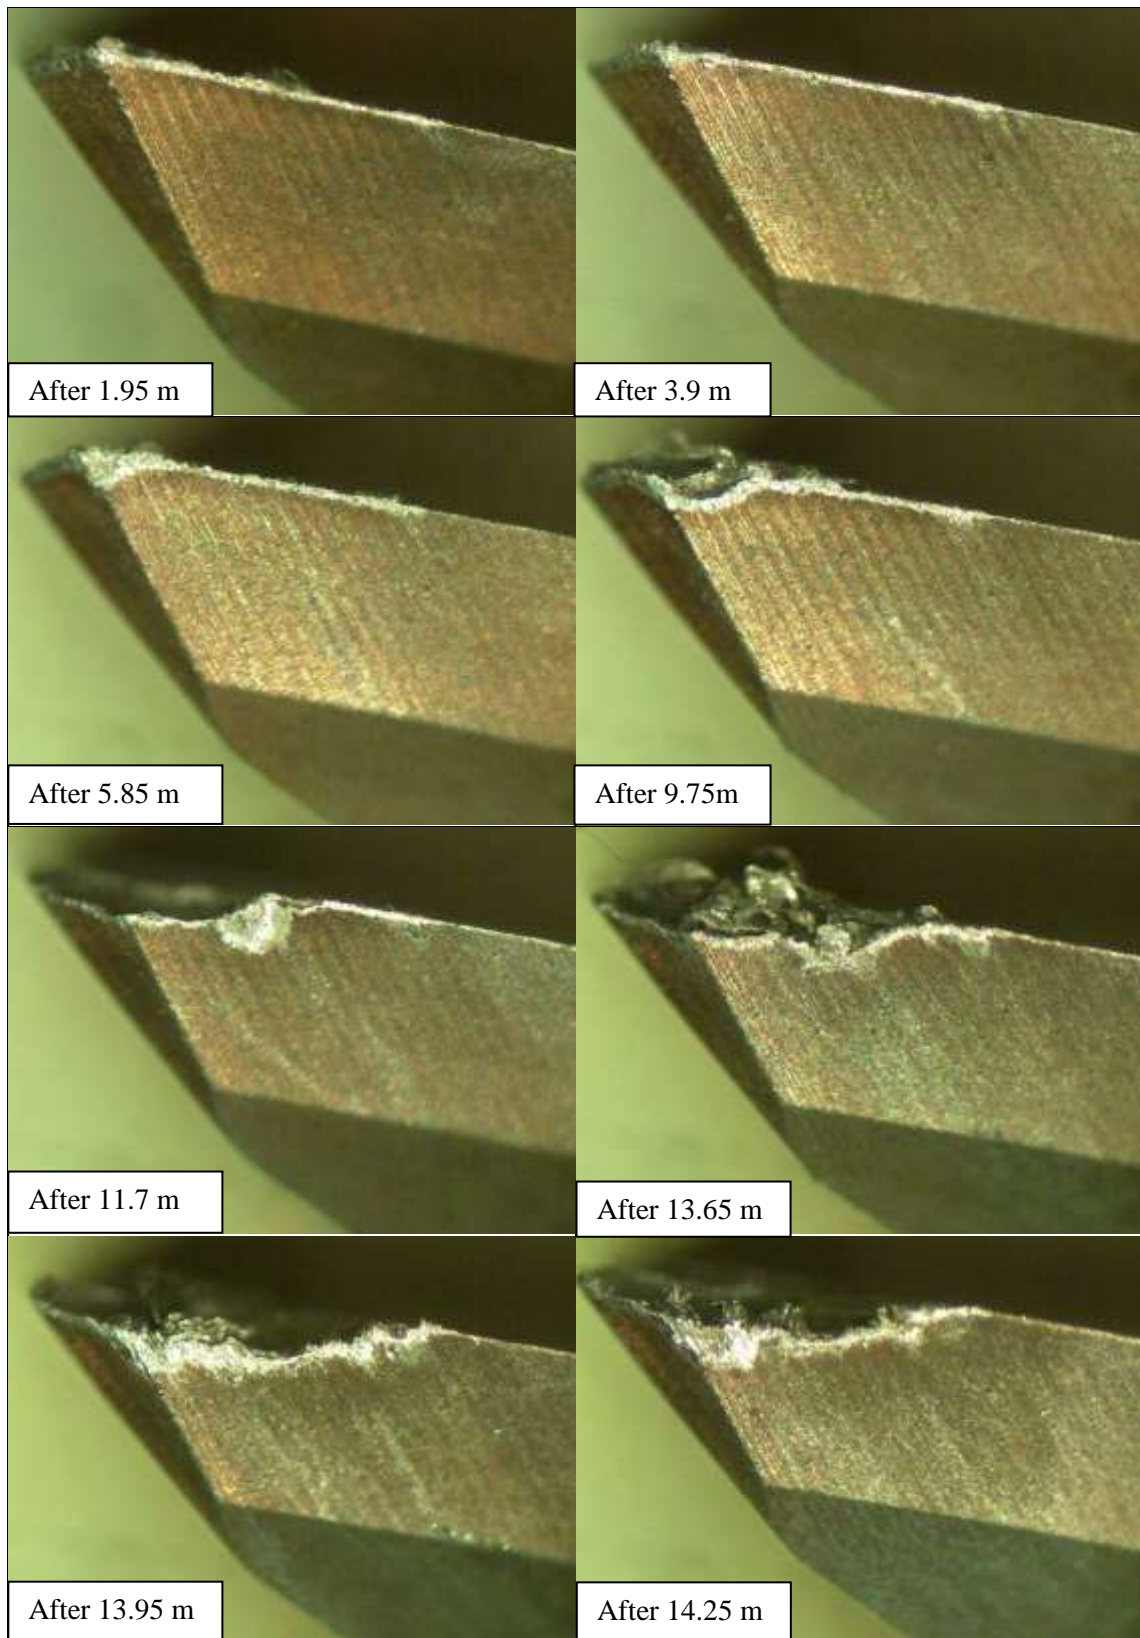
Tool images showing flank wear development until wear criterion for the most affected tooth when machining Ti-6Al-4V at 90 m/min under flood cooling
